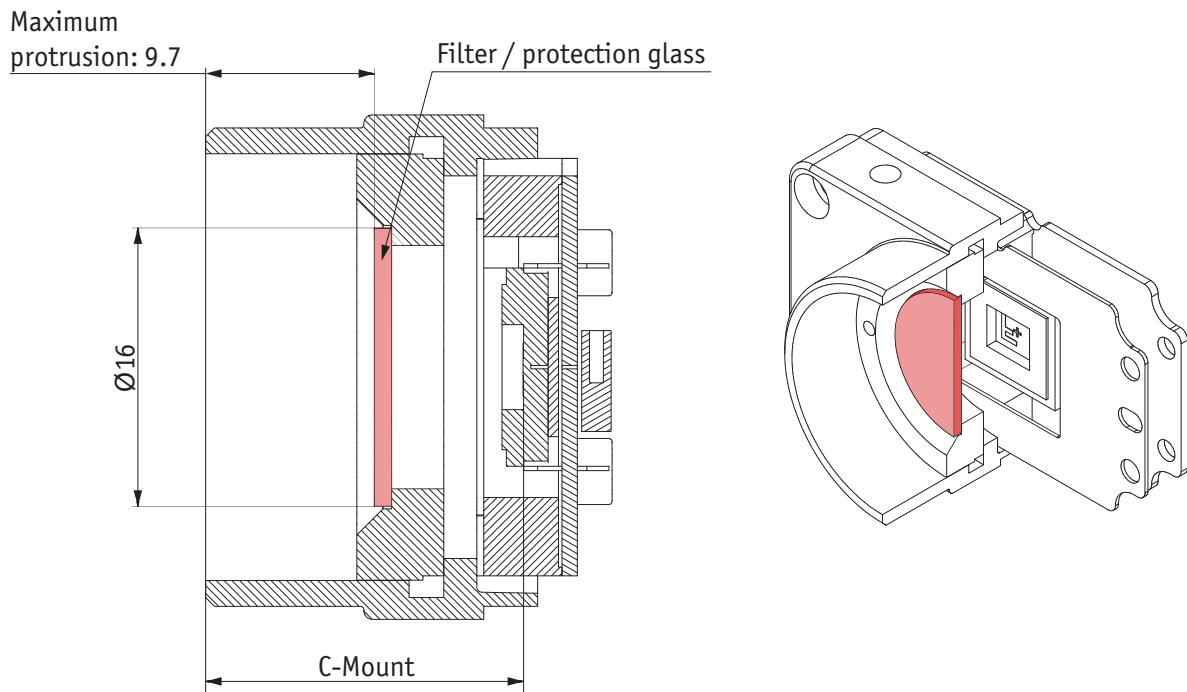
Manta C-Mount dimensions (16 mm filter, type A)
